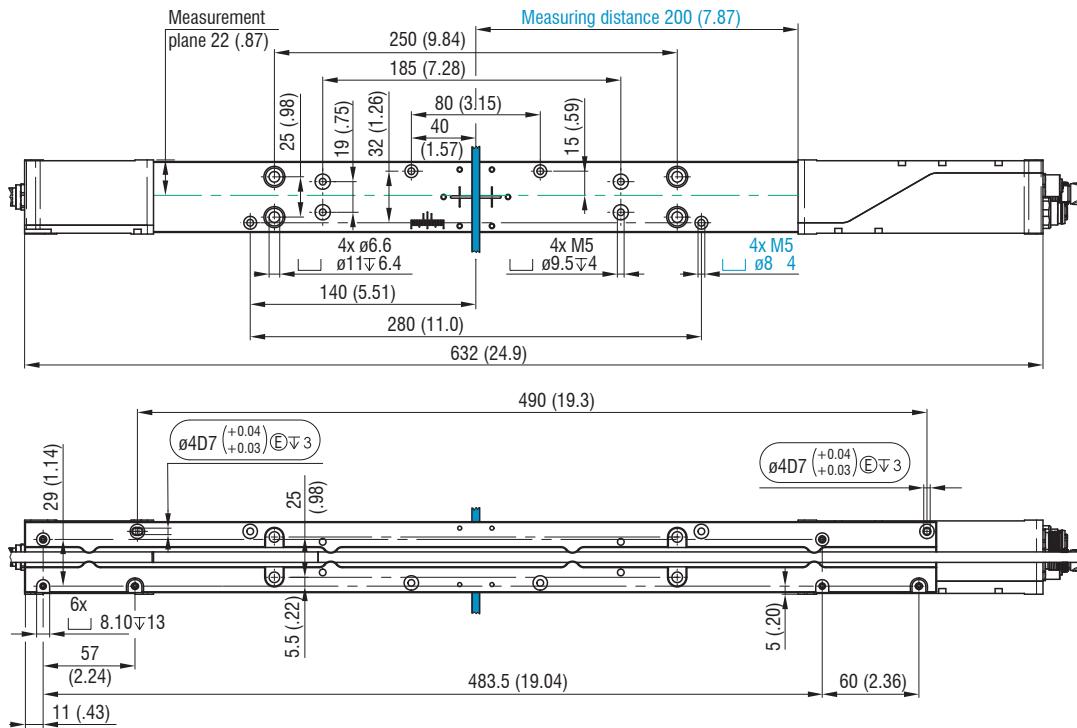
Dimensional drawing of light source and receiver ODC2700-40(002) with mounting rail, dimensions in mm
